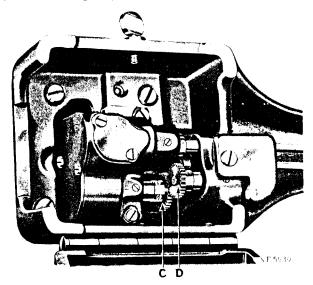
View of Machine, Showing Stitch Regulating Gears
